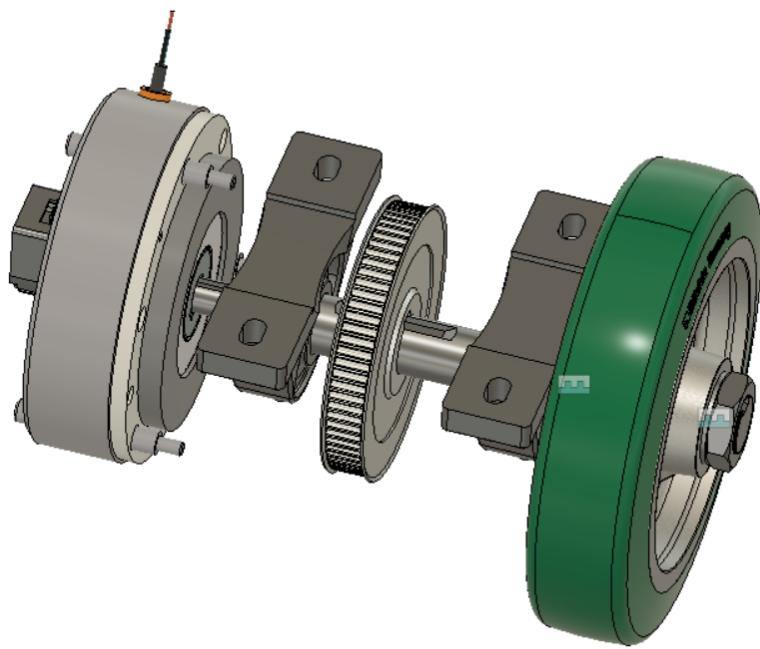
Shaft Assembly. From left to right: brake, bearing, pulley, bearing, wheel.
